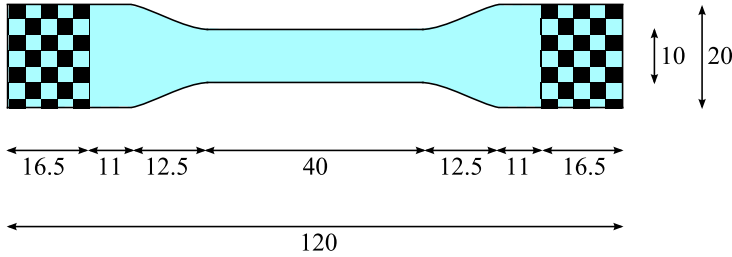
Dimensions in [mm] of PVB specimens for uniaxial tensile testing; thickness of the specimen is 0.76 mm.
